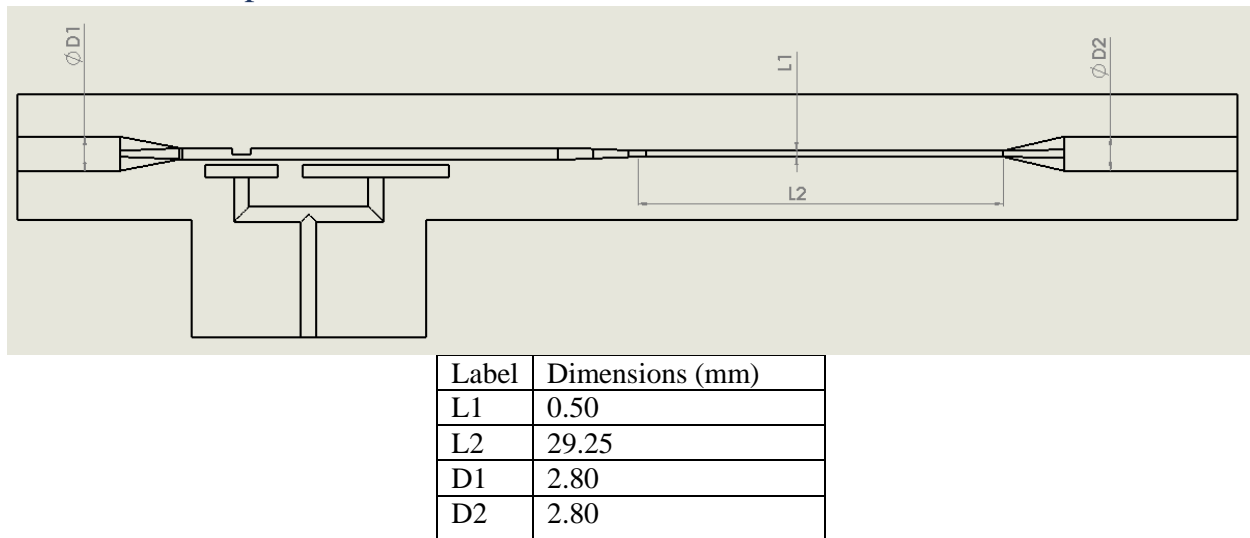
Test Pump 4 top view of cross section, with dimensions
